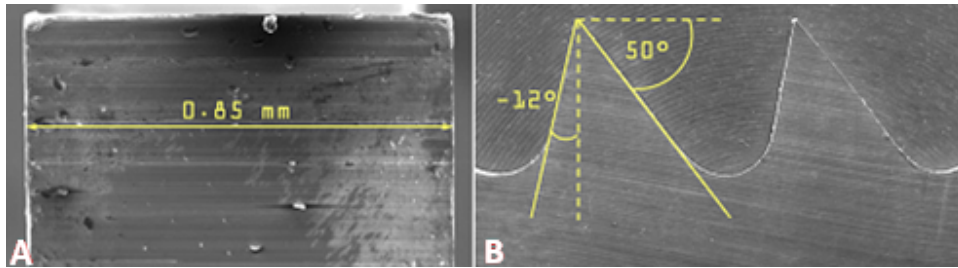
A) Edge Width: B) Rake and Flank of Tooth
